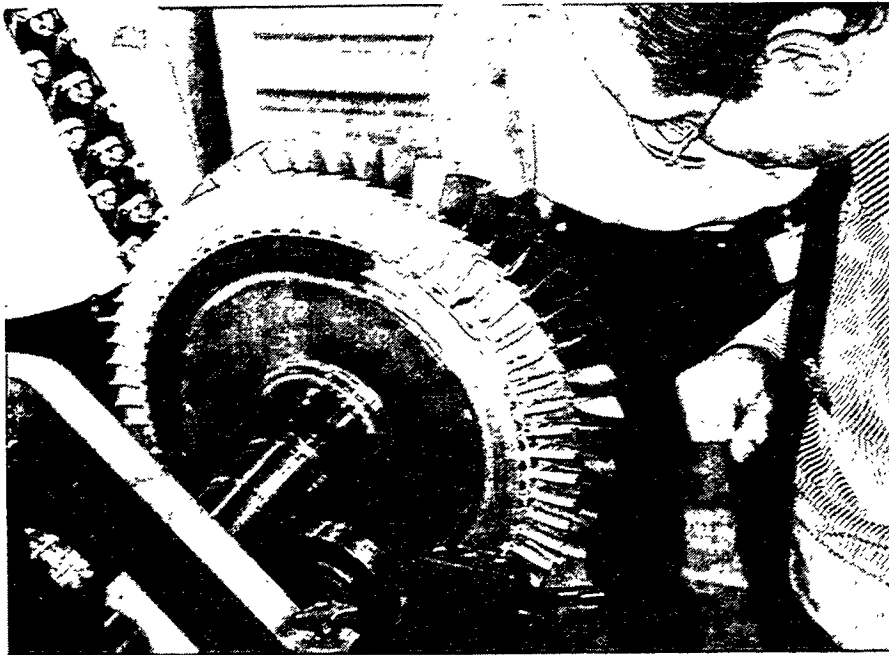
First Stage Disk with NT164 Dovetail Blades During Engine Assembly
